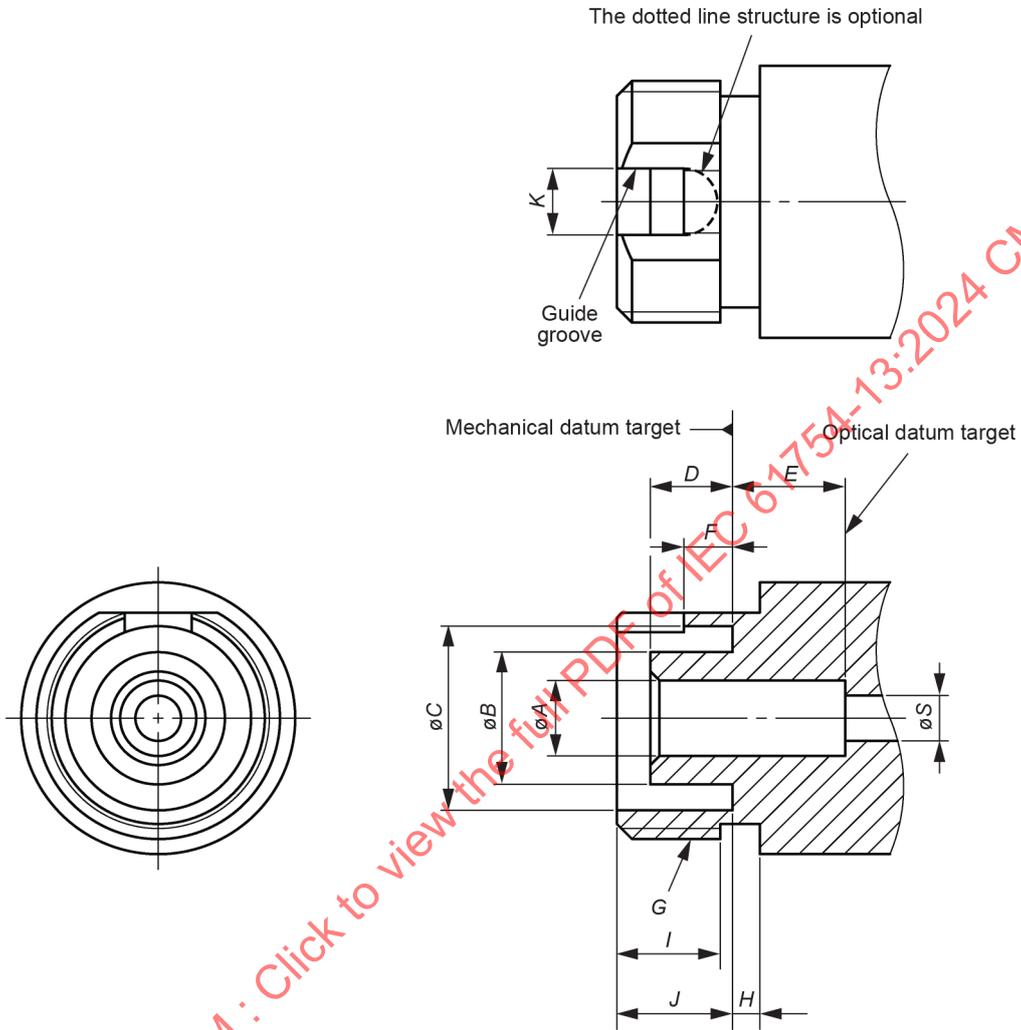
Pin gauge for adaptorTable 5 – Pin gauge dimensions*Dimensions in millimetres
